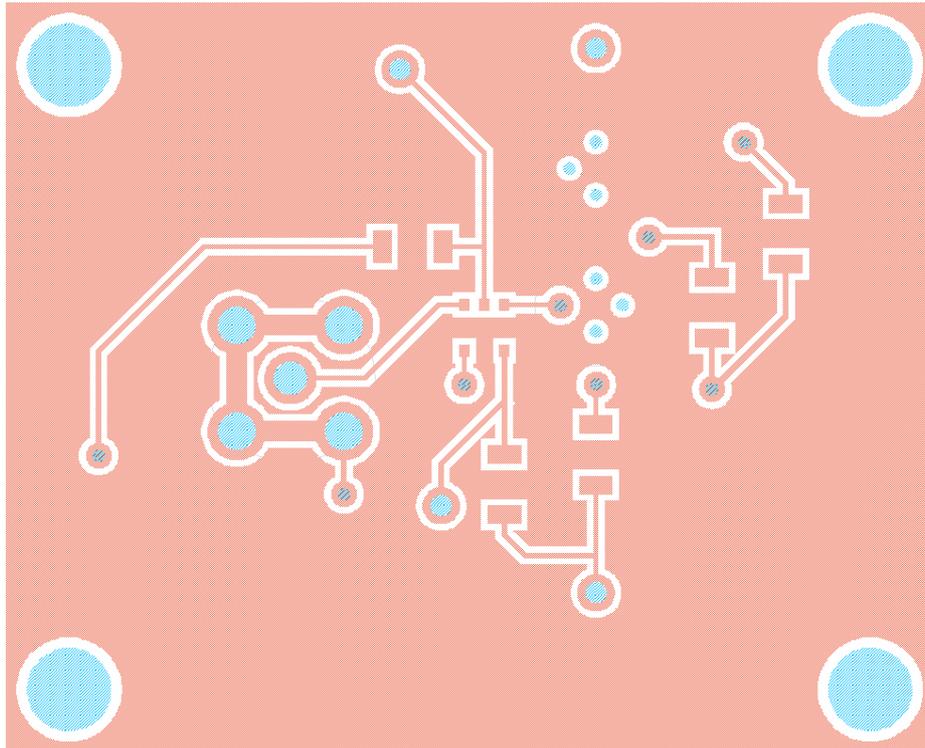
Top layer of the serializer circuit board. Size of board: 75 mm x 65 mm.
